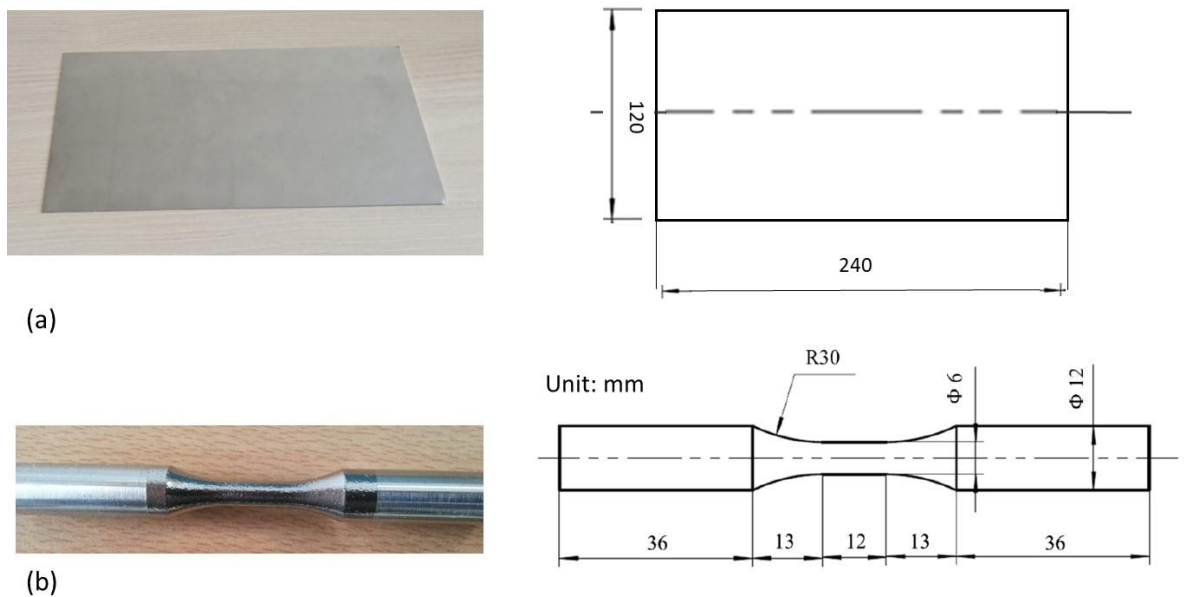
(a) 316L stainless steel sheet and its dimensions (b) 316L dumbbell shape sample for fatigue test and its dimensions.
